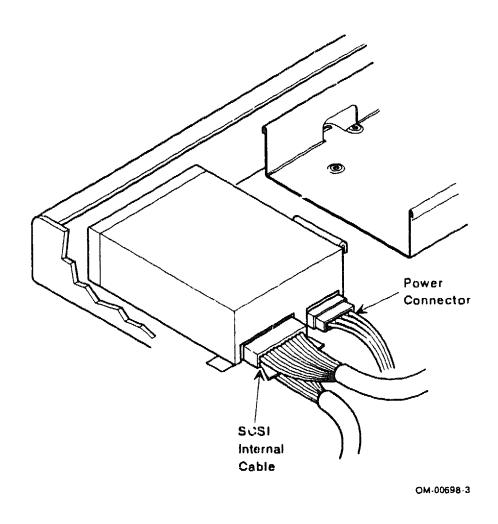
SCSI Device Rear Connections (3.5-Inch Mounting Tray)
